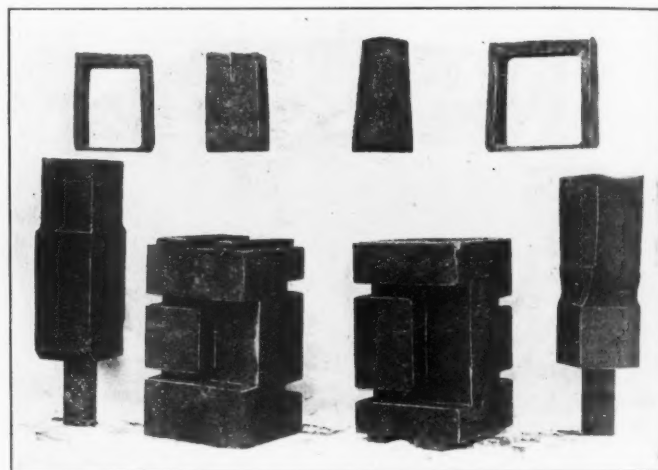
DIES AND HEADERS FOR FORGING SPRING BANDS.
